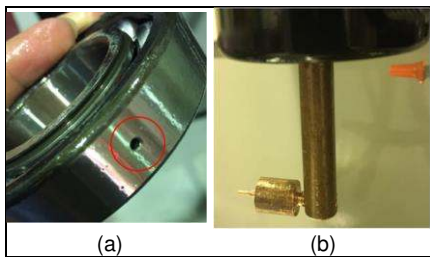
Bearing defects machining. (a) A sample of defect seeded on the outer race. (b) Example of the machining tool.
